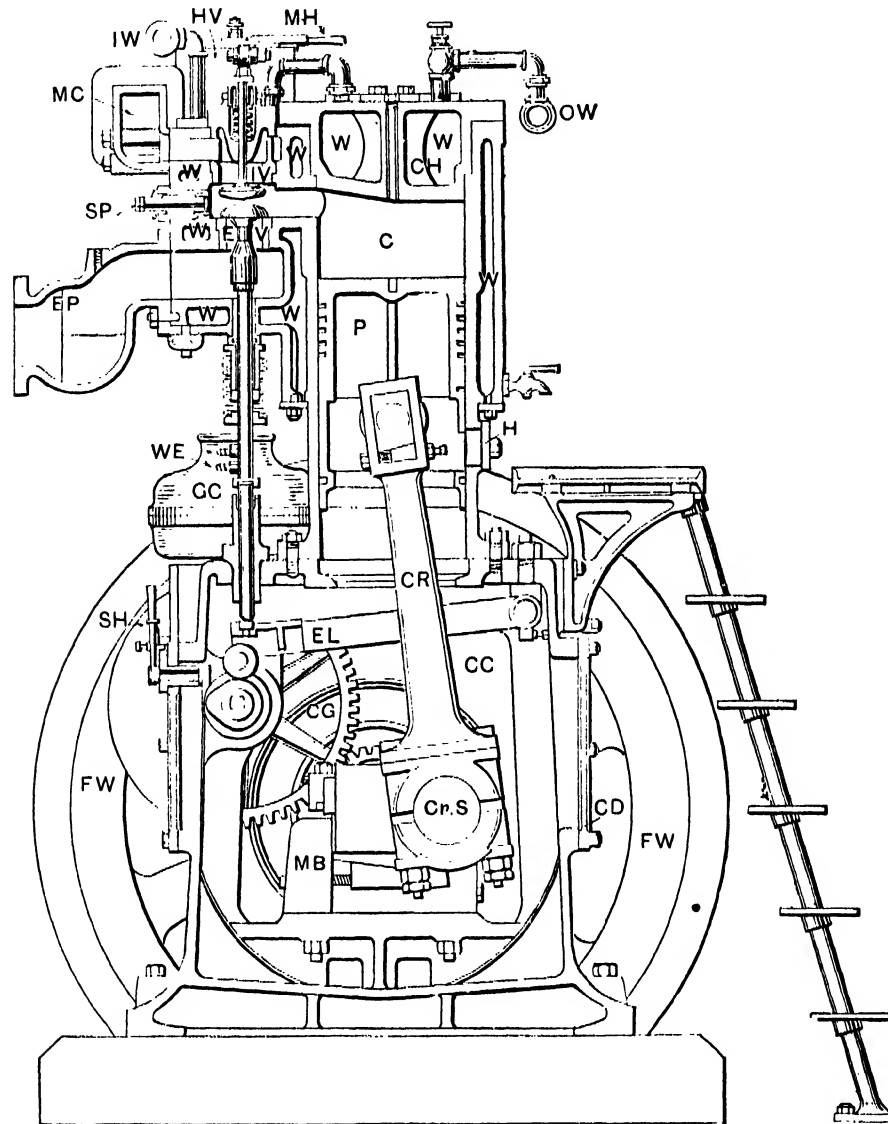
Sectional Side Elevation of Westinghouse Single-acting Gas Engine
